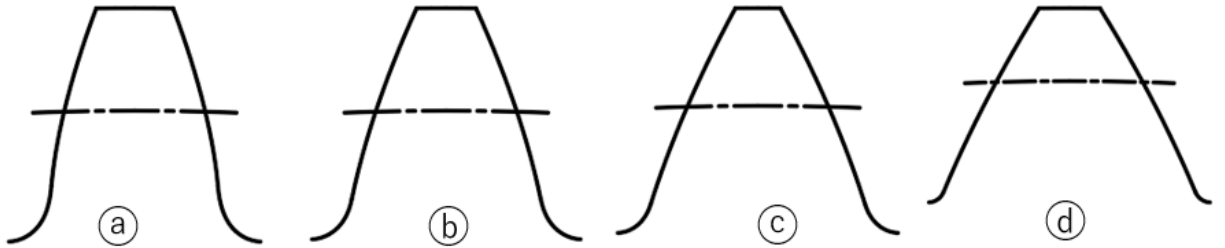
Gear geometries without profile shifting in Z57 pinion gear. (a) 15° gear geometry. (b) 20° gear geometry. (c) 25° gear geometry. (d) 30° gear geometry.
